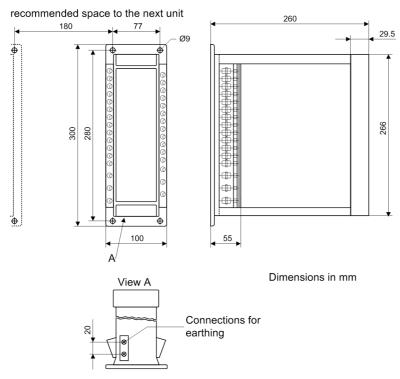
Dimensions of Series Device 7XT7100-0BA00 for Panel Surface Mounting where:
